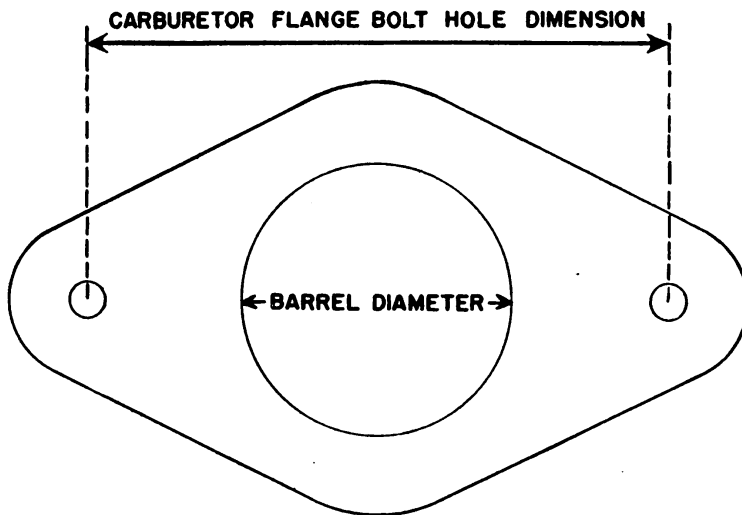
How to measure the barrel diameter of a carburetor and the distance between flange bolt holes.
